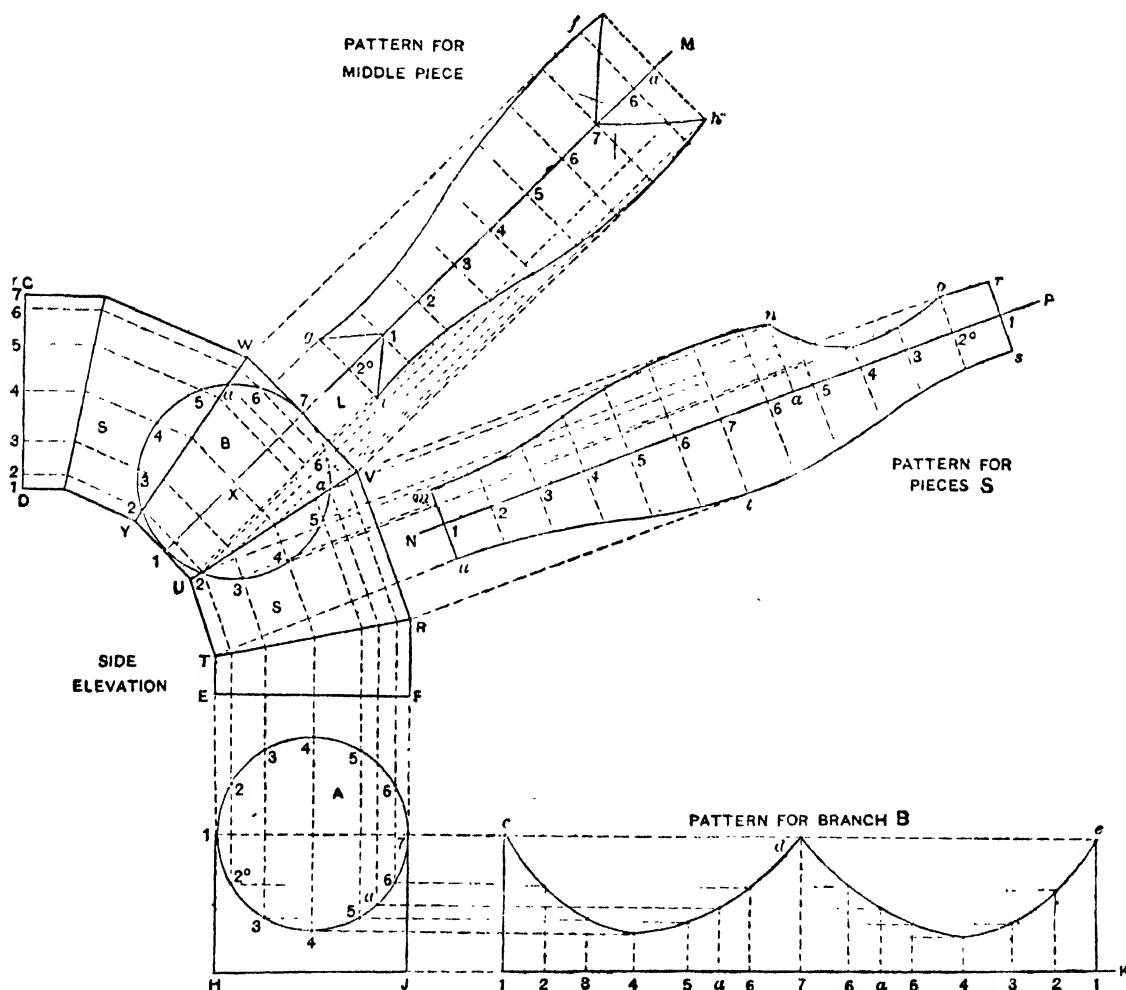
Elevation, Sections and Patterns for Branch Intersecting Side of Elbow
